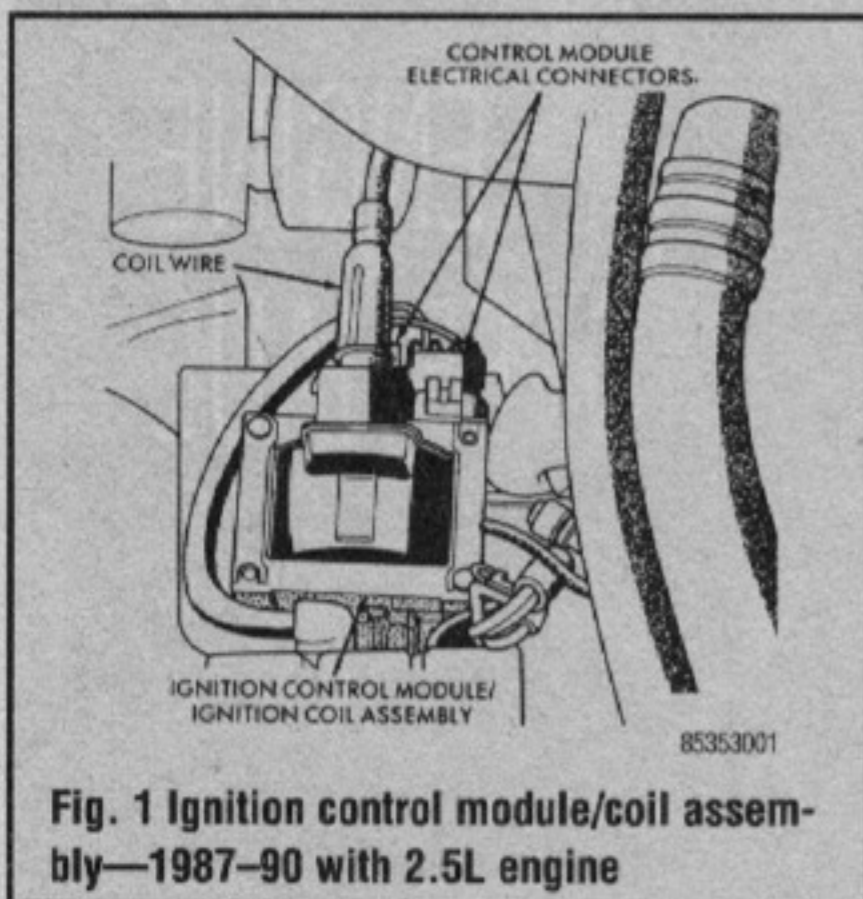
Ignition control module/coil assembly—1987-90 with 2.5L engine
